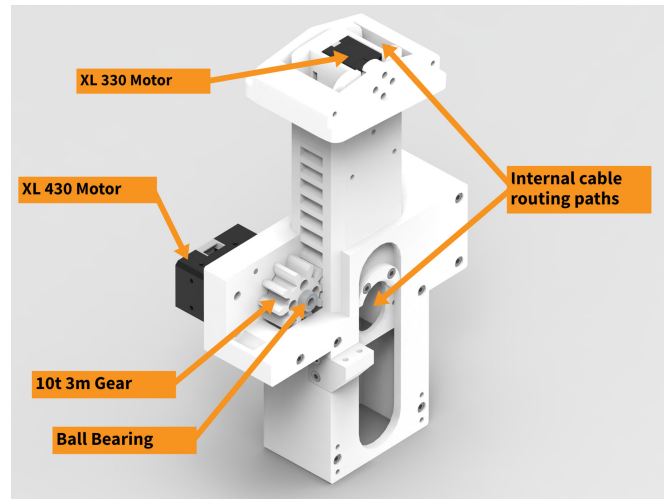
Overview of the neck mechanism, with a partial section view showing the internal gear enabling the neck's extension.
